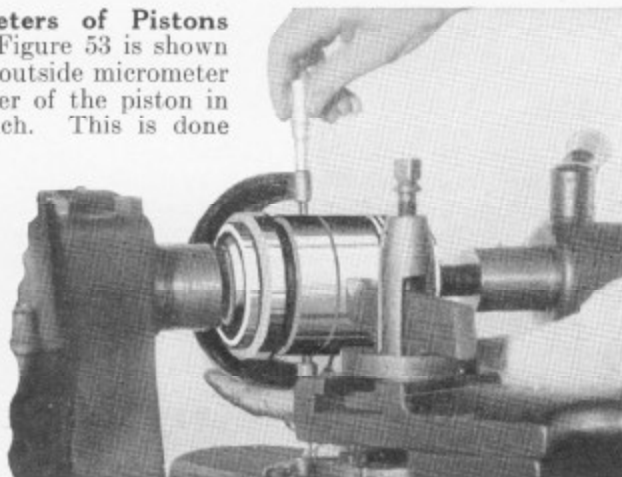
Measuring Diameter of Piston with Micrometer Calipers
